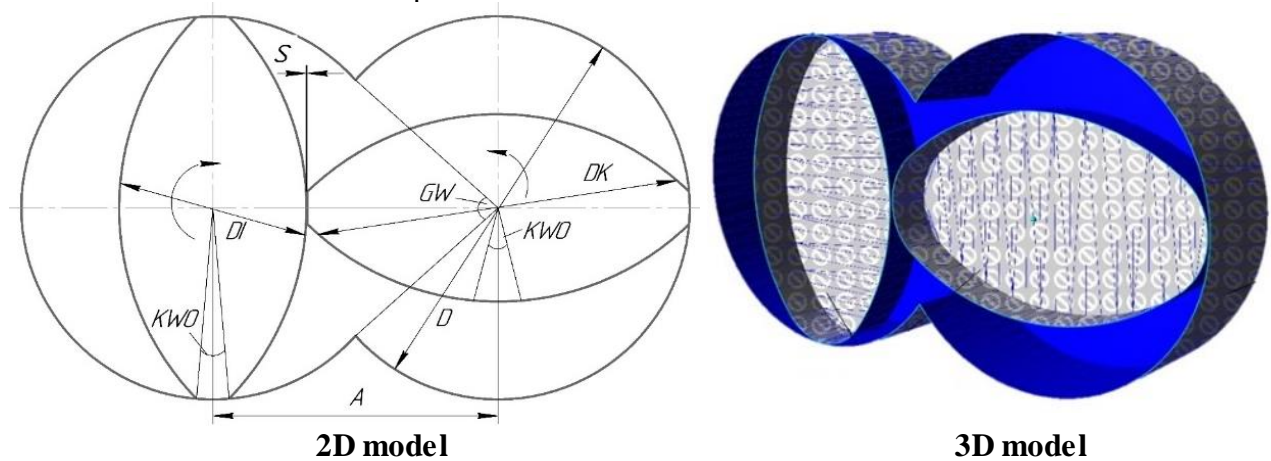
Specified geometric dimensions mixing chamber and located therein cam working elements
